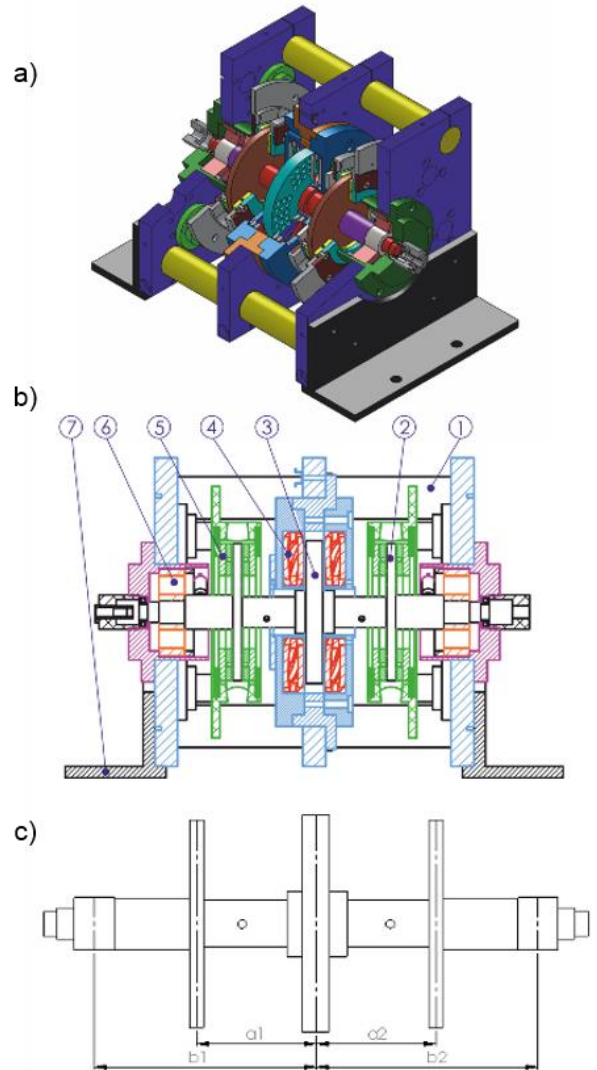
a): isometric section view of the test rig, b), Cross section view, c) rotor view with geometrical parameters.
